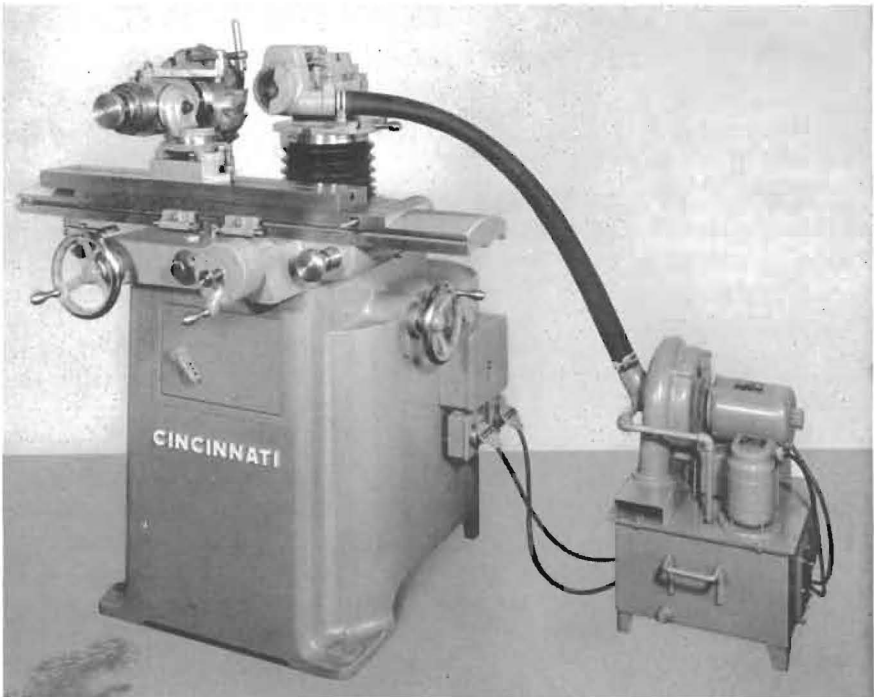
Coolant system applied to a cutter grinder to wet grind carbide cutters with diamond-impregnated wheels.
